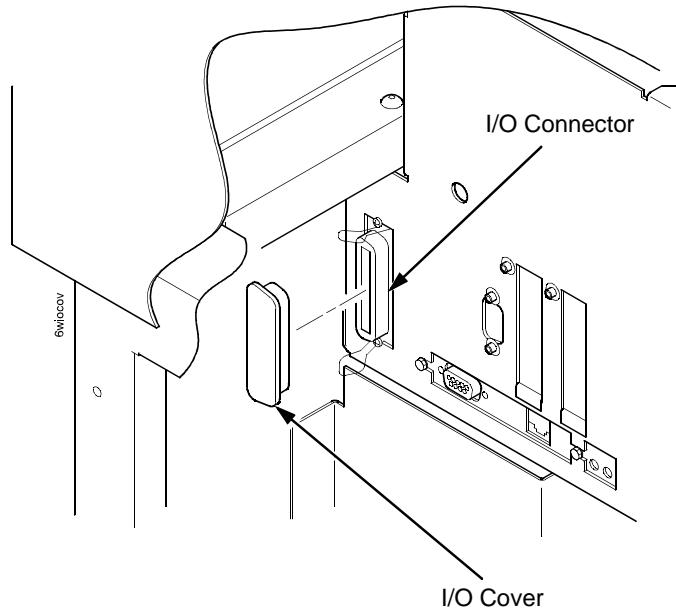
Upper-Rear Inside View of the Cabinet Model Showing I/O Cover Removal
